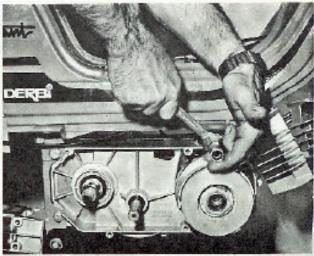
Finally remove the 3 bolts that hold the engine in the chassis and remove the engine.
